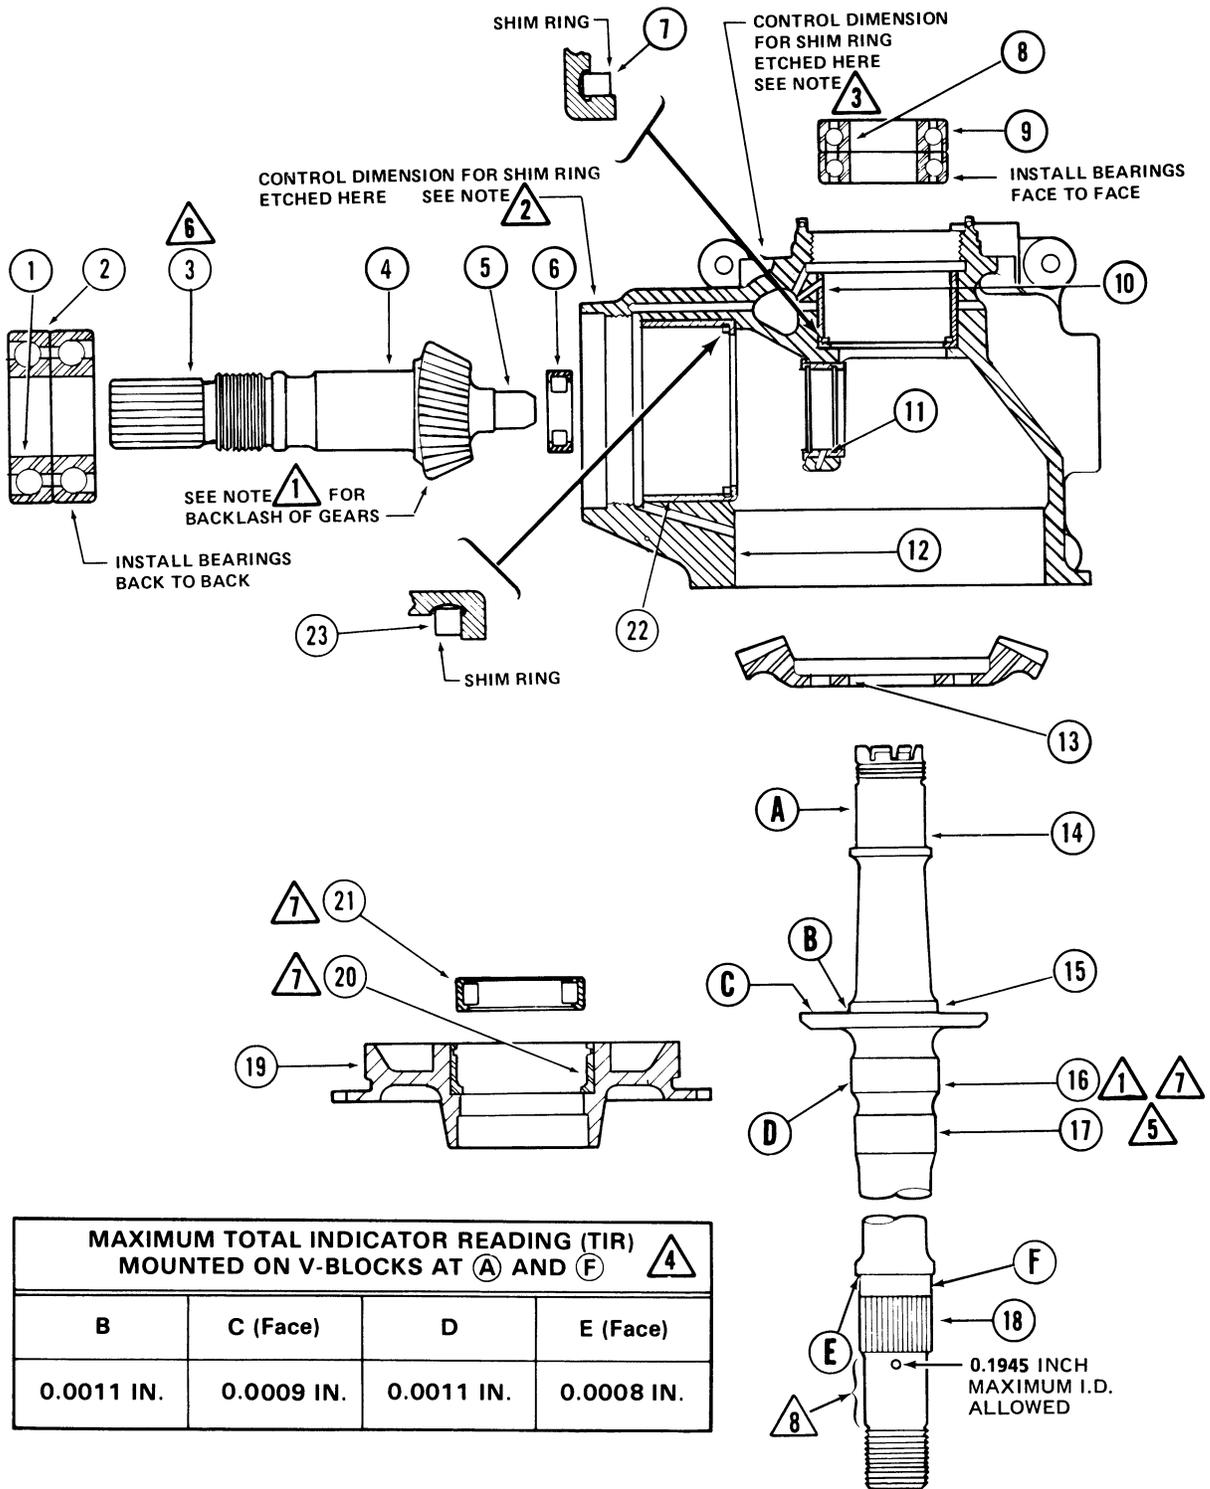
Tail Rotor Gearbox — Limits Chart (Sheet 1 of 2)
